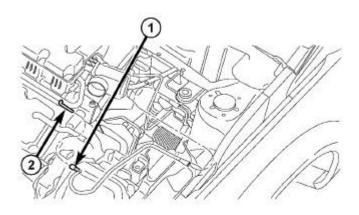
MOUNTING BOLTS Courtesy of CHRYSLER LLC
